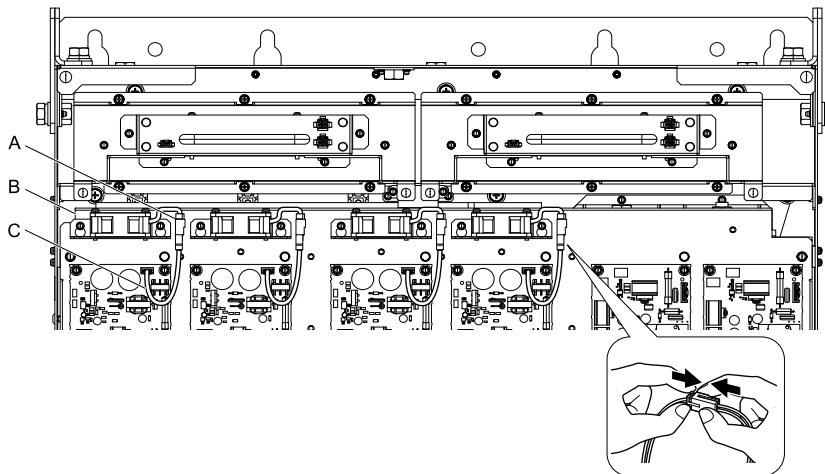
Install the Circuit Board Cooling Fan Unit
